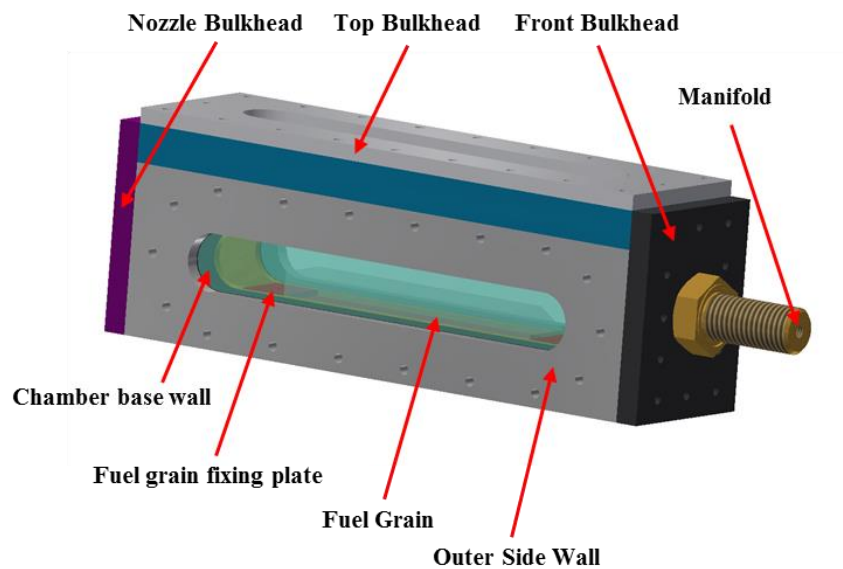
Manufactured combustion chamber assembly (Theba, et al., 2017)
